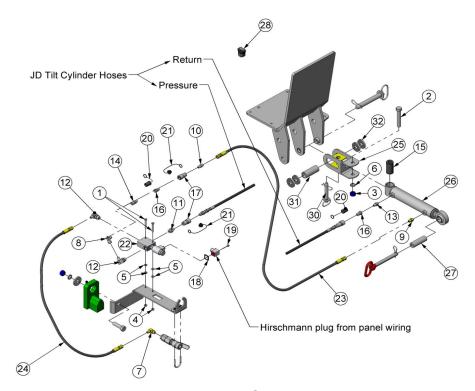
Hydraulic Tilt Cylinder - Exploded View
